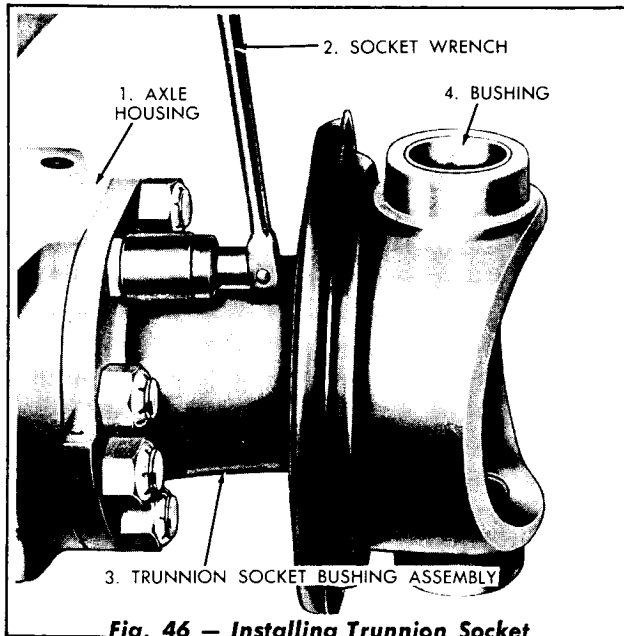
Installing Trunnion Socket Bushing Assembly
